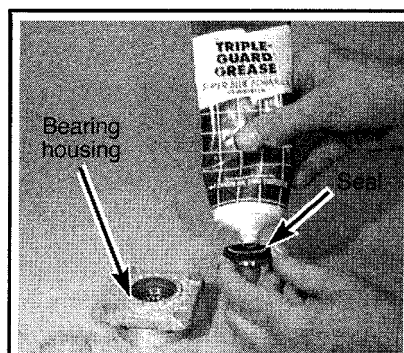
Apply a light coating of grease to the seal lips (though this is best done after the seal is pressed into the housing)
